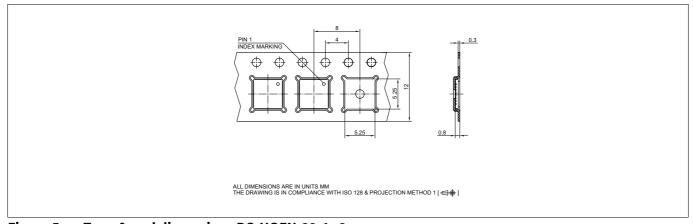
Tape & reel dimensions PG-UQFN-32-1,-2
